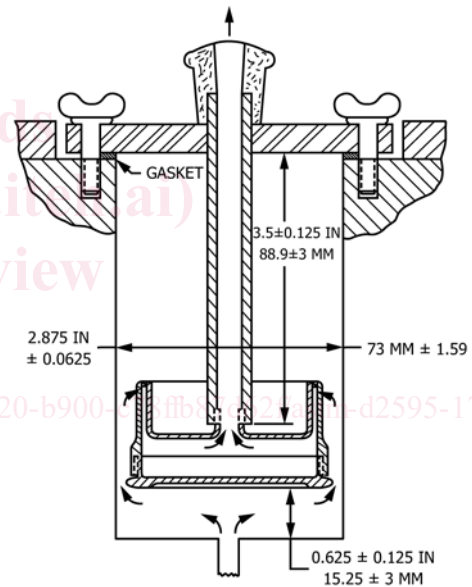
Assembled Test Cell in Aluminum Block Heater
